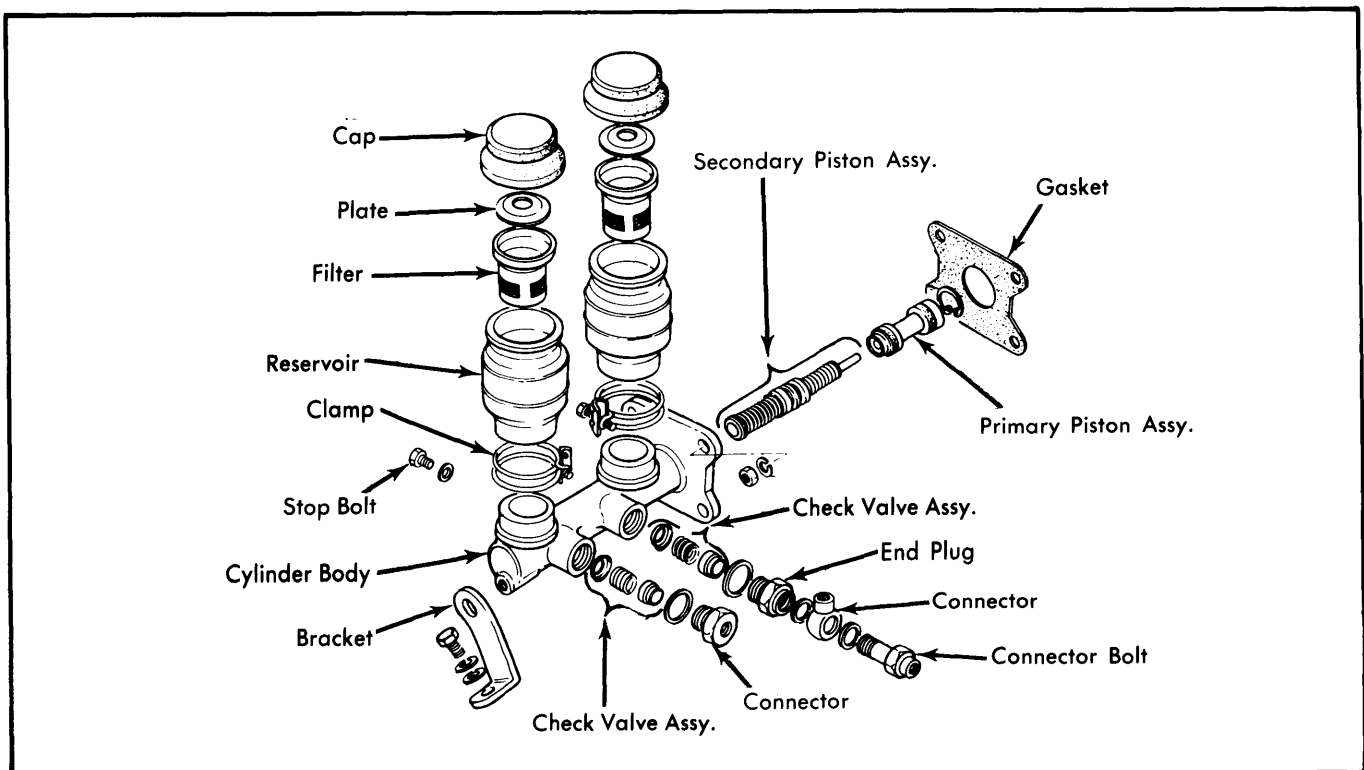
Master Cylinder Reservoir, Body and Piston Assembly
